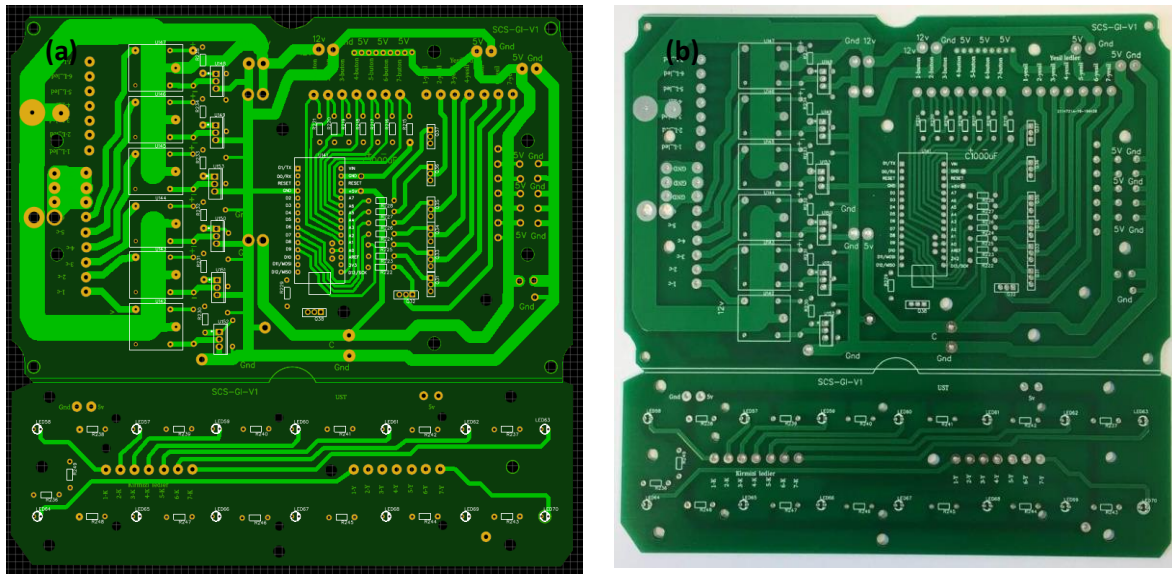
a) Drawing of a double-layer circuit board (b) The produced form of the circuit board
